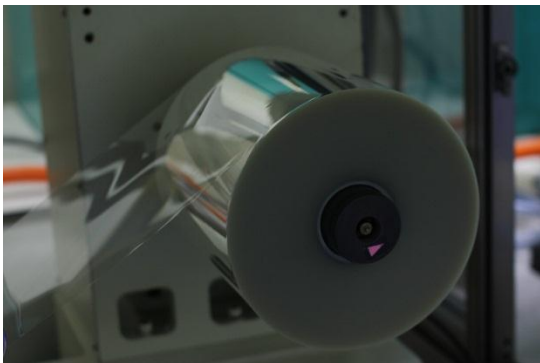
Infeeder cylinder of a roll-to-roll printing machine.
